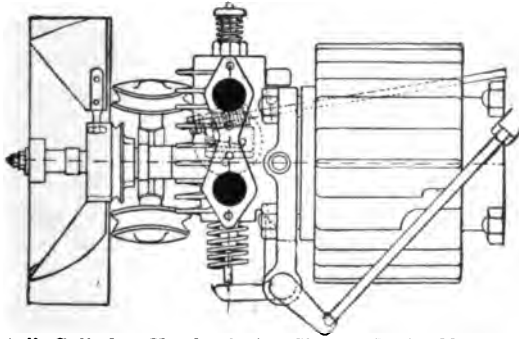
Detail Cylinder Head of the Simms Cycle Motor, showing fan wheel, cooling ribs, and peculiar arrangement for opening the exhaust. Similar fan wheels are used on several types of light vehicle motor.
